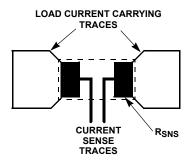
RECOMMENDED CURRENT SENSE RESISTOR PCB LAYOUT
